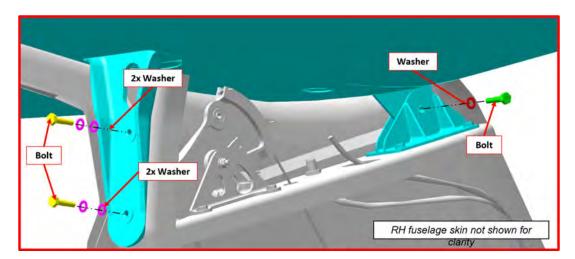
INSTALL BOLTS AND WASHERS UNDER THE HEAD
